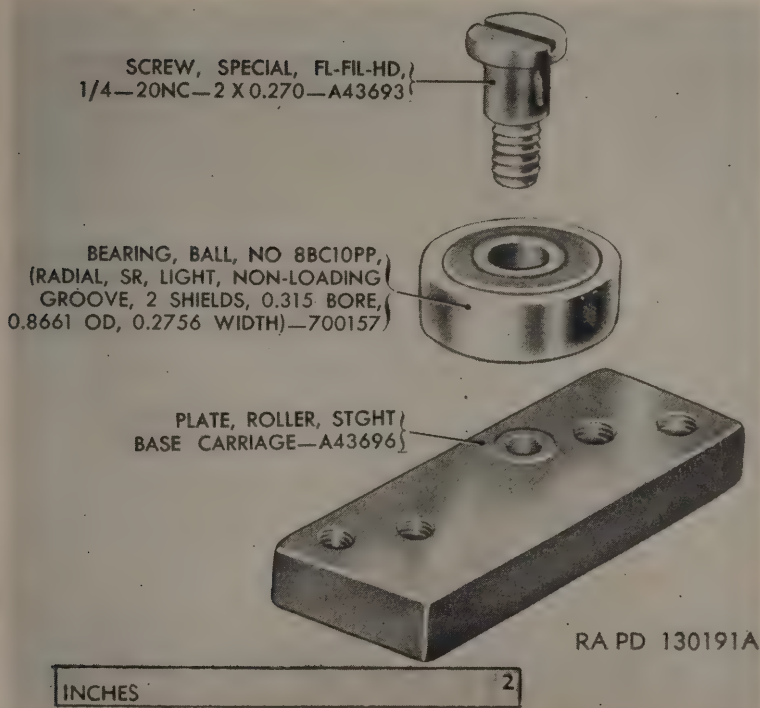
Components of the straight-base carriage roller plate assembly—sound-ranging plotting board M1 or M1A1.
